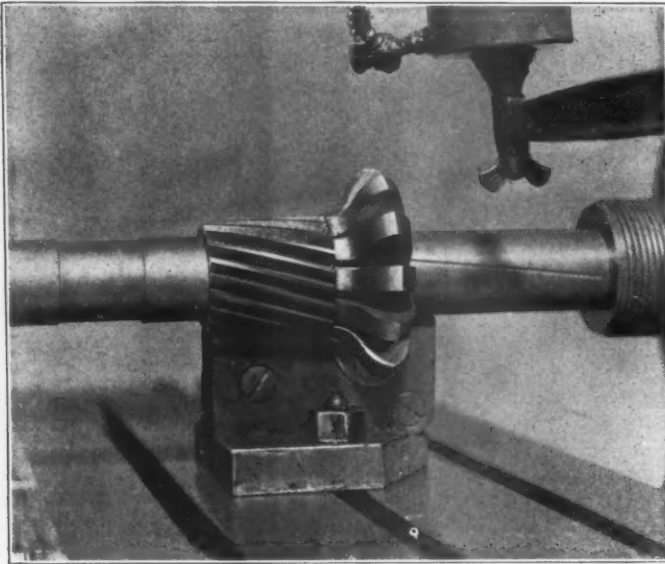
Milling Cutter for Machining Wheel Lathe Tools
